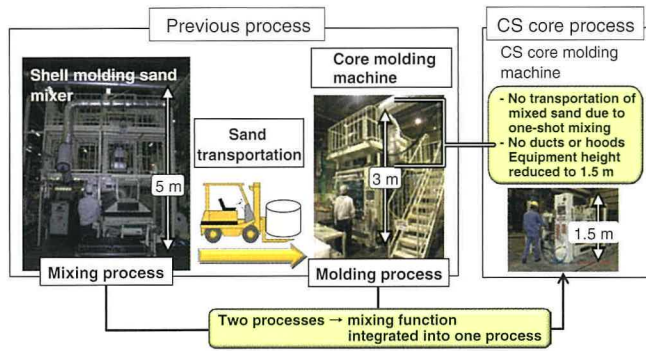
Molding Machines Used by Conventional and CS Core Processes
